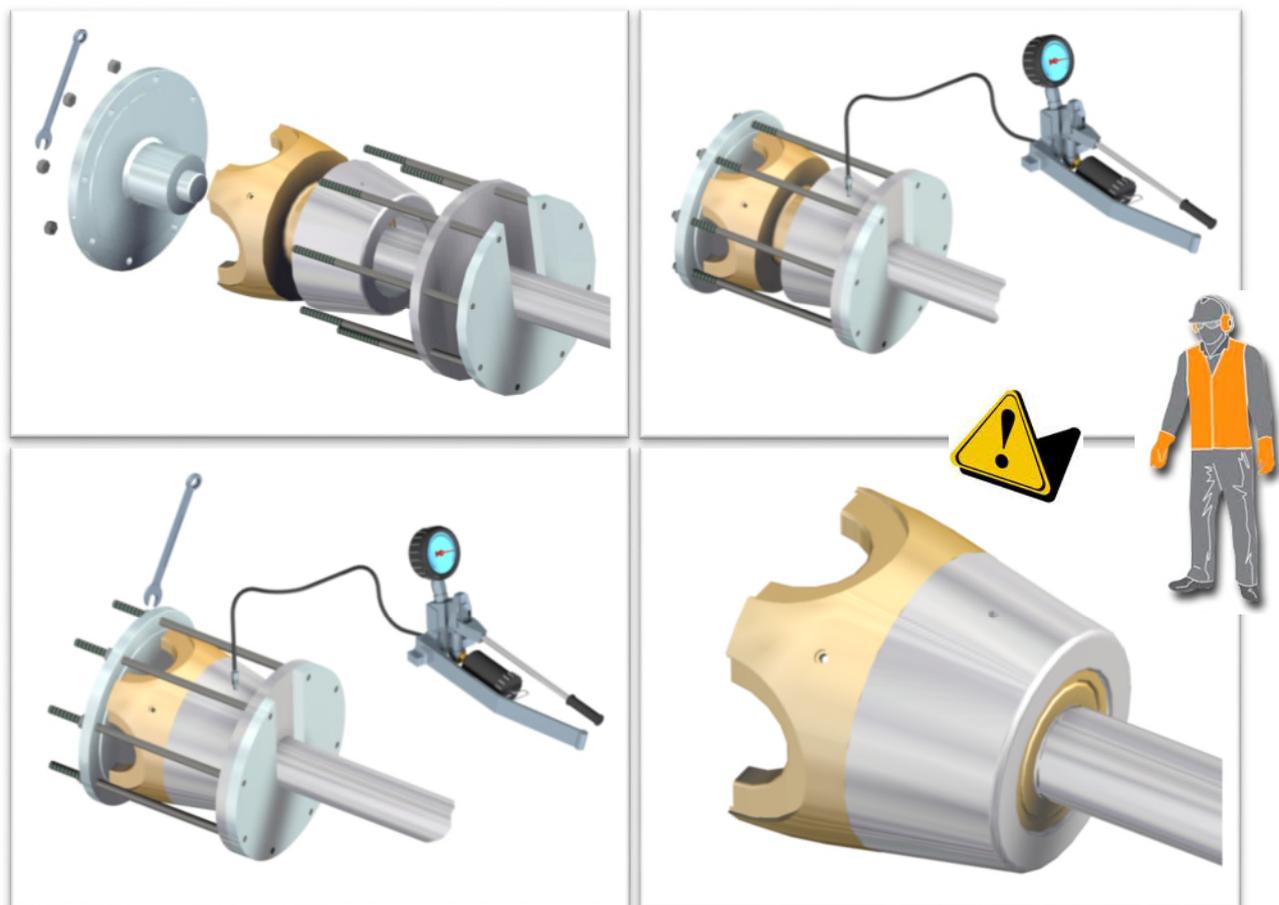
Different steps in mounting propeller hub to shaft.
